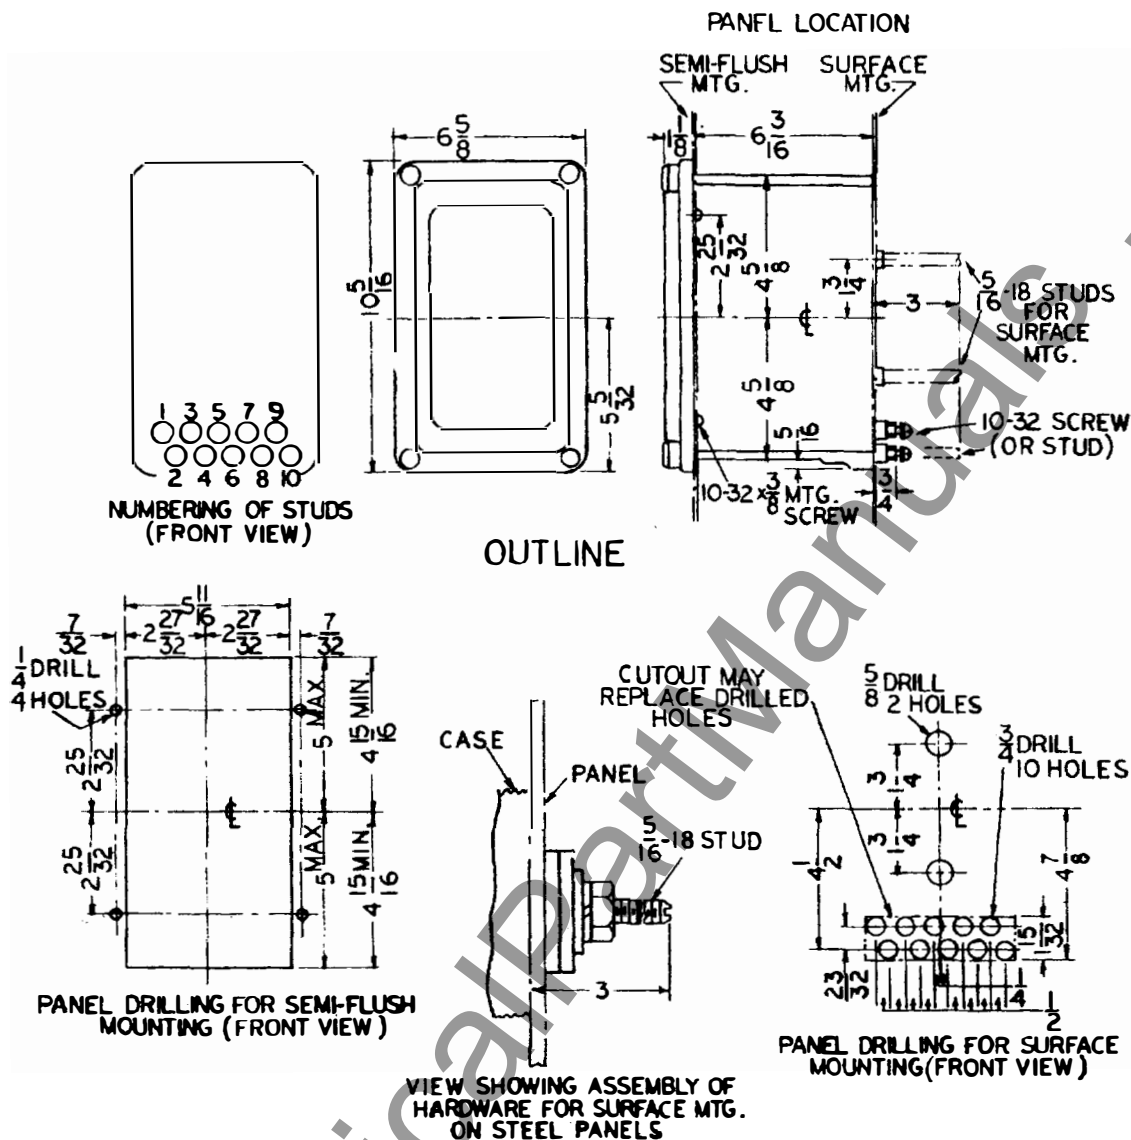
(0227A8541-0) OUTLINE AND PANEL DRILLING DIMENSIONS FOR THE IAC66S RELAY
